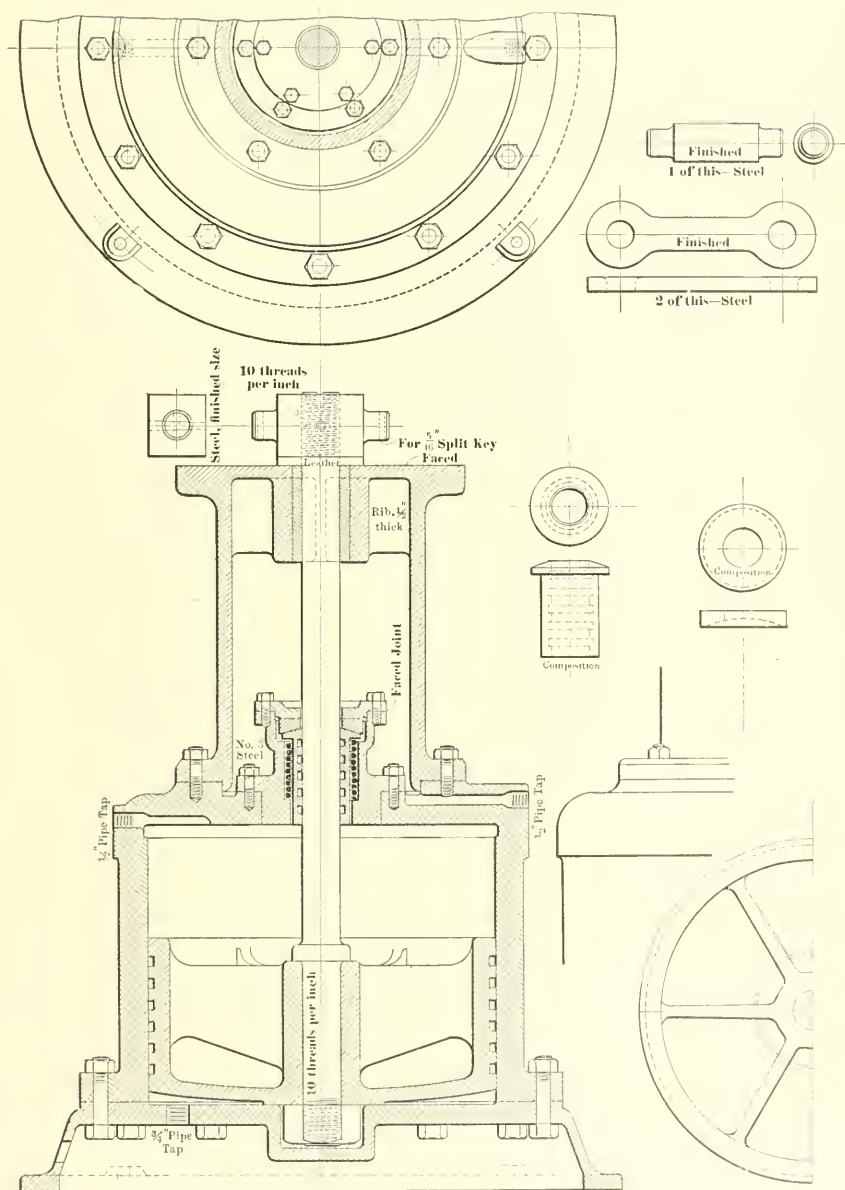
HYDRAULIC TESTING MACHINE. CAPACITY 25,000 POUNDS.
